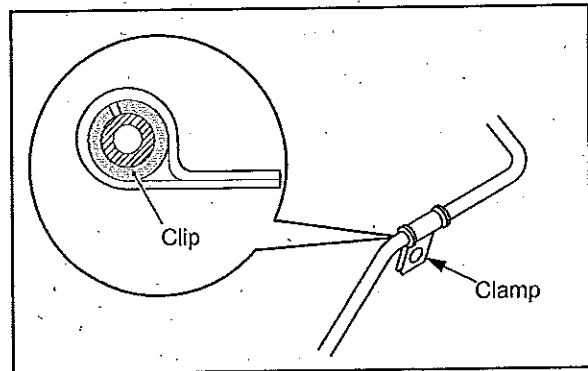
Low pressure fuel pipe and Clip - Inspect
